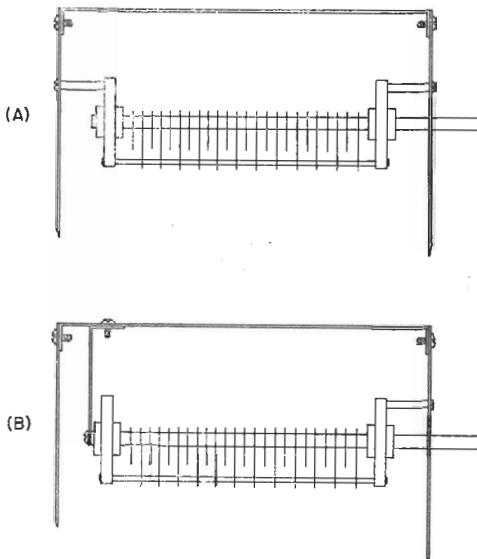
Sketches showing (A) original mounting of the variable padder and (B) the alteration in mounting that eliminated frequency jumping in a Clapp oscillator.
